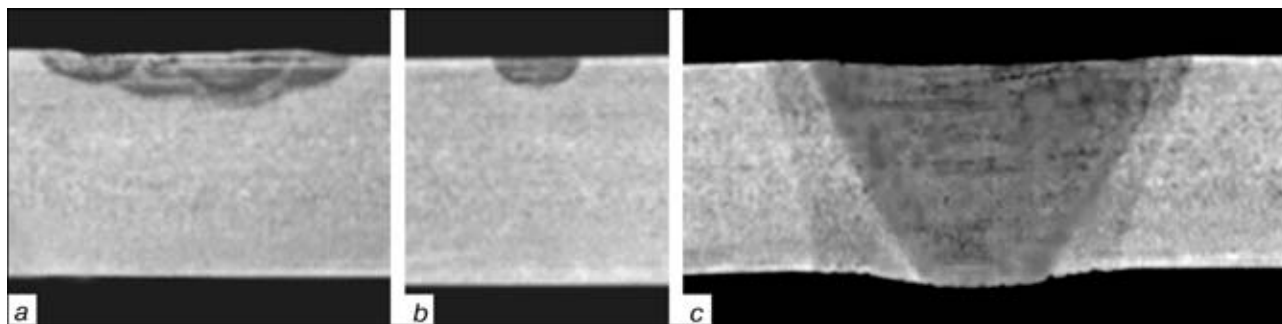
Macrosection of a sample of aluminium alloy AMg3 3.0 mm thick with penetration by microplasma (*a*), laser (*b*) and hybrid (*c*) welding using the alternating-polarity arc (current 35 A) and YAG laser (radiation power 1.2 kW)
